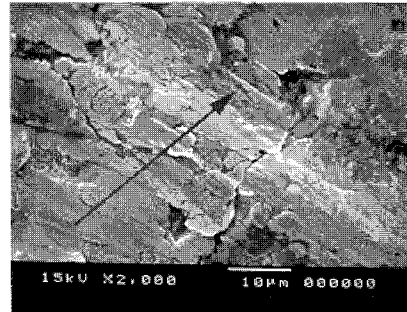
valve spindle of exhaust valve(1-EXH-01)
